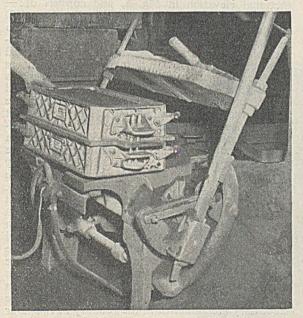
Hines "Pop-off" Flask in Use on a Jackman "Farwell" Hand-squeeze Moulding Machine.
